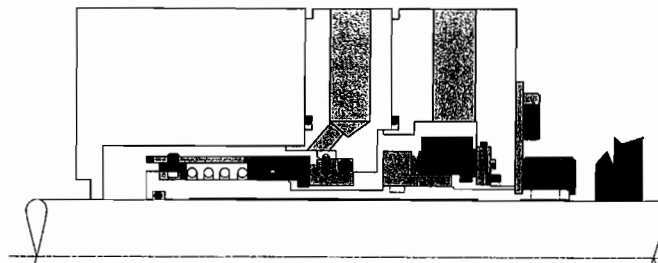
Backup Seal to a Liquid Primary (Single Spring Pusher).
